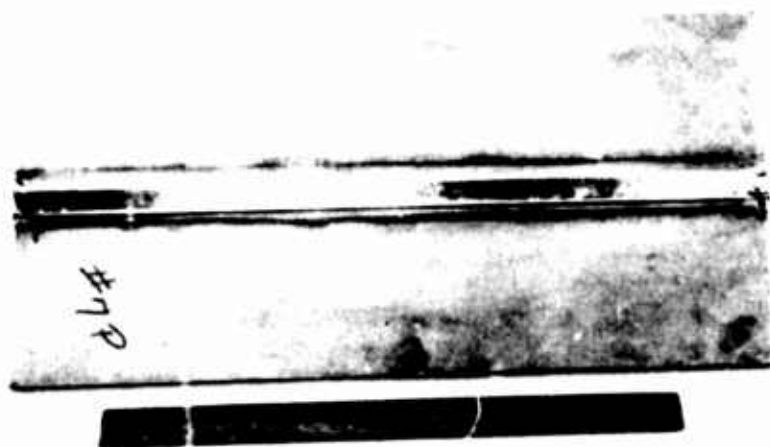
PLASMA ARC WELDED PLATE
